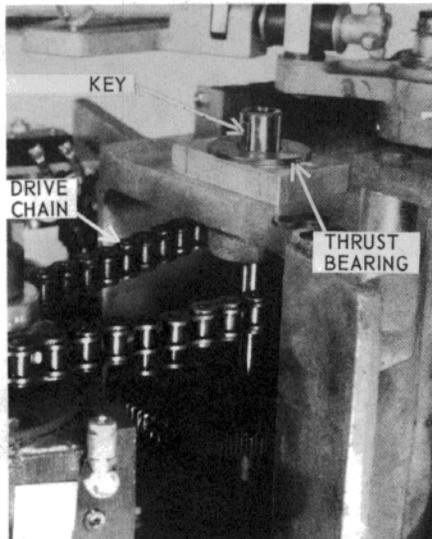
Angling Shaft Thrust Bearing, Angling Crank Key, and Drive Chain
